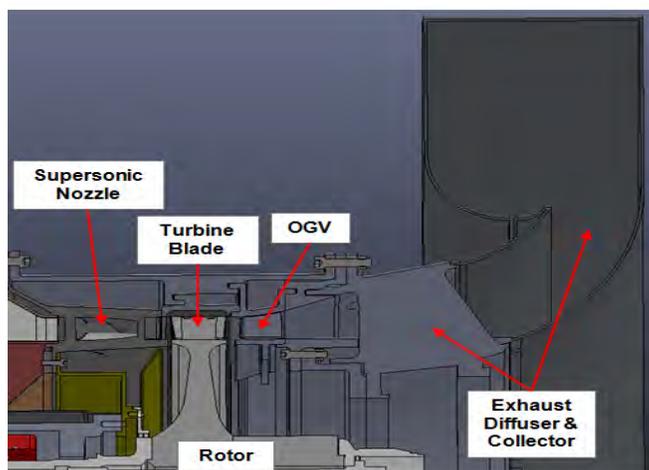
10:1 Turboexpander Test Combustor, Turbine, and Exhaust Layout
